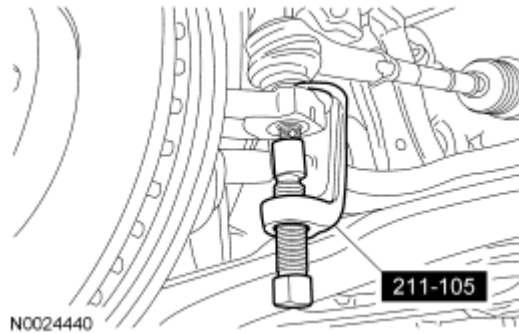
Disconnecting LH And RH Tie Rod End From Steering Knuckle
